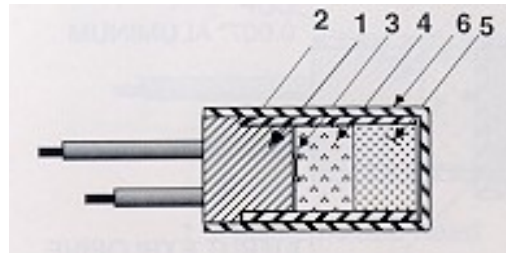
The RP-80 EBW explosive train 1. Plastic molded head
